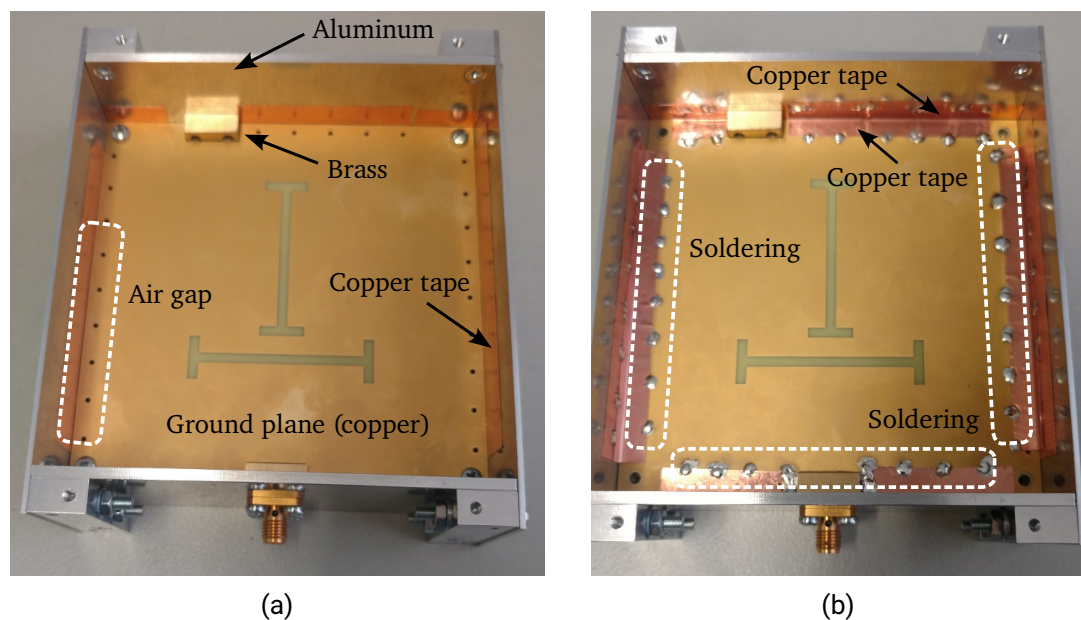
(a) Prototype construction process. (b) Additional soldering to assure electrical continuity.
